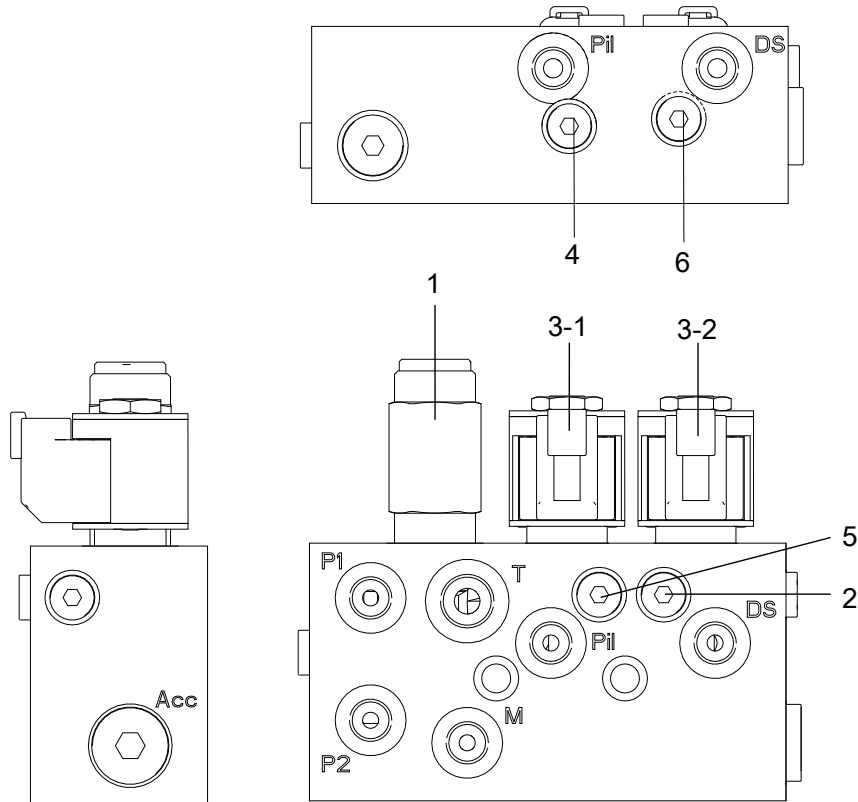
Brake & Two-speed Control Valve Manifold (PN.20204000006)
